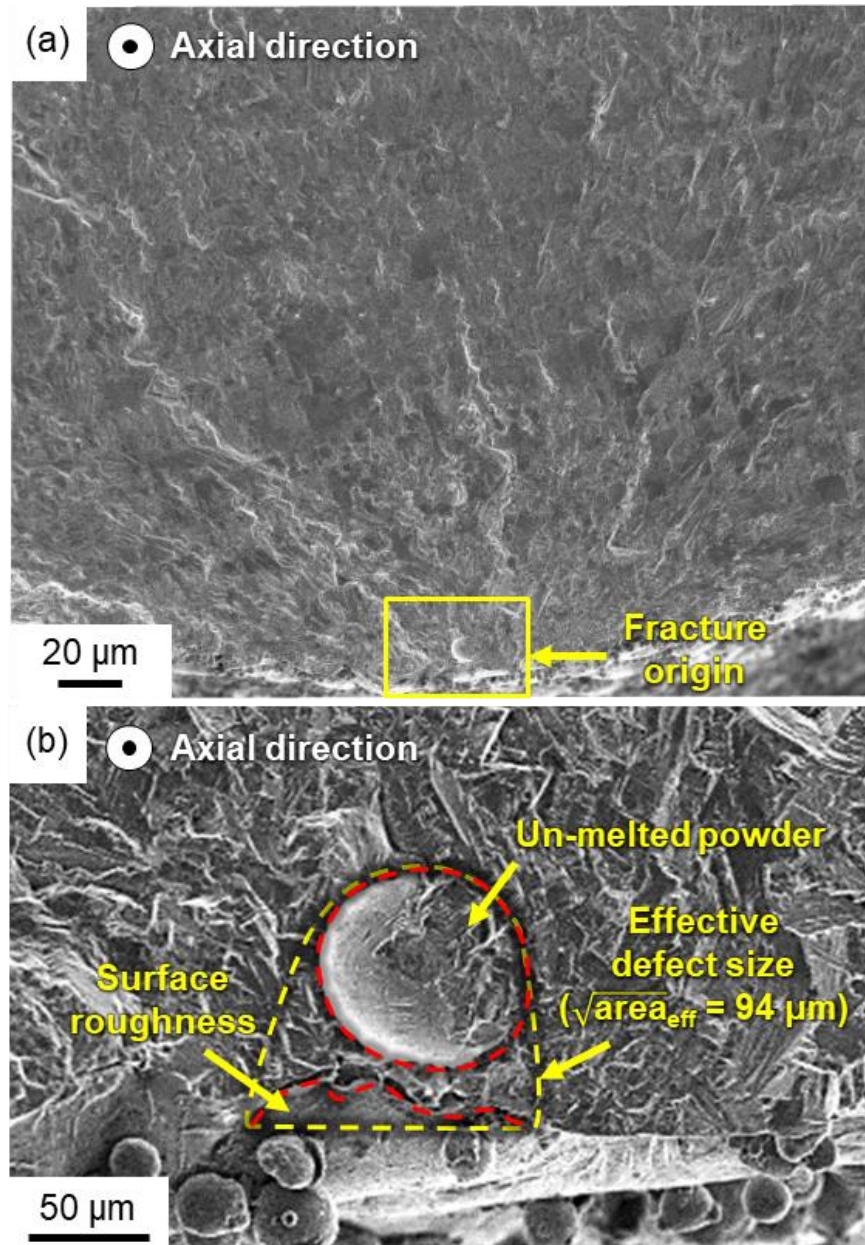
(a) SEM image of the fracture surface of AM-H-HIP as-built run-out specimen with as-built condition tested at R of 0.1; (b) SEM image of the fracture origin in (a).
